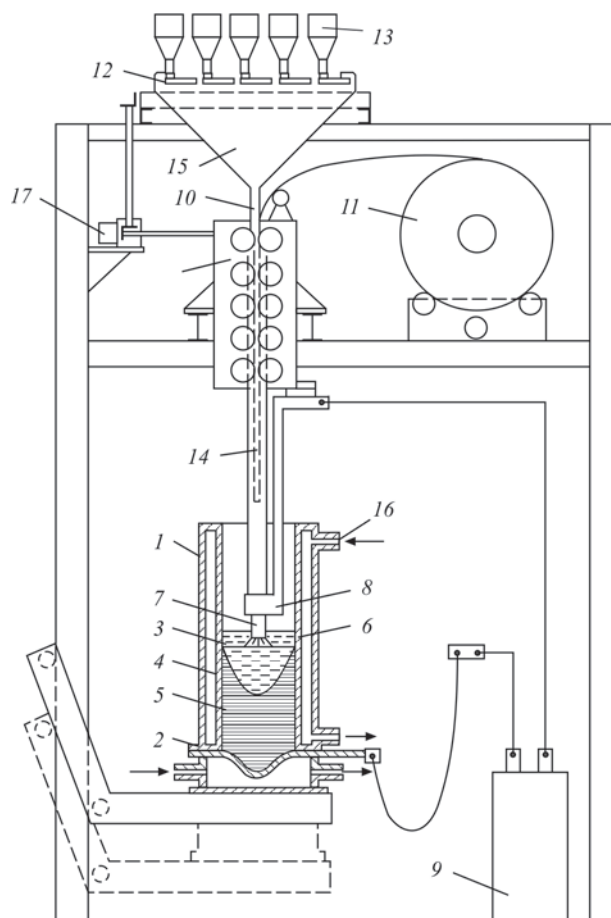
Scheme of Kellogg-process: 1 — mould; 2 — bottom plate; 3 — liquid slag; 4 — liquid metal; 5 — ingot; 6 — electric arc; 7 — consumable tubular electrode; 8 — current lead; 9 — heat source; 10 — tube forming device; 11 — strip coil; 12 — dosage unit; 13 — measuring hopper; 14 — pour out tube; 15 — hopper; 16 — cooling water input; 17 — motor drive
